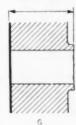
H. This is an internal face of the type often machined from a line bar. In mass production work such an operation would often achieve location of internal faces simultaneous to machining one or more other surfaces. The interrelation of the location of these surfaces so machined would thus be inherent with the construction of the bar and the spacing of the cutters.
